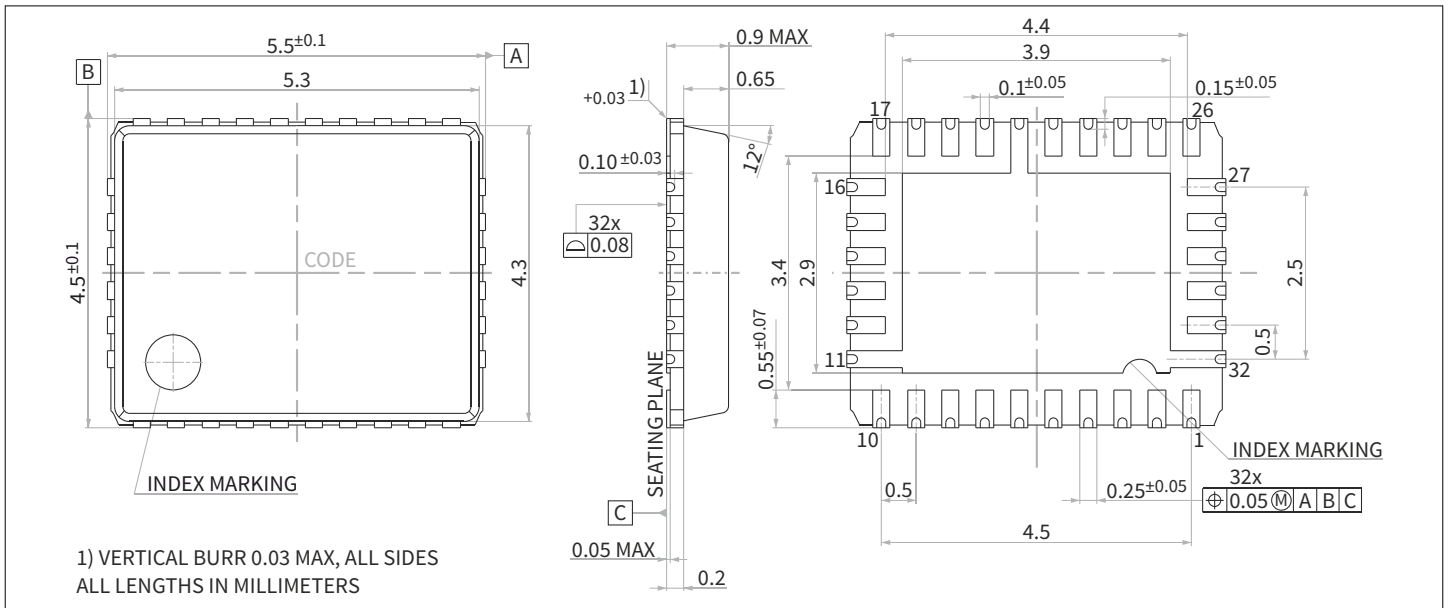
Package outline with top, side, and bottom view of VQFN-32-9.
